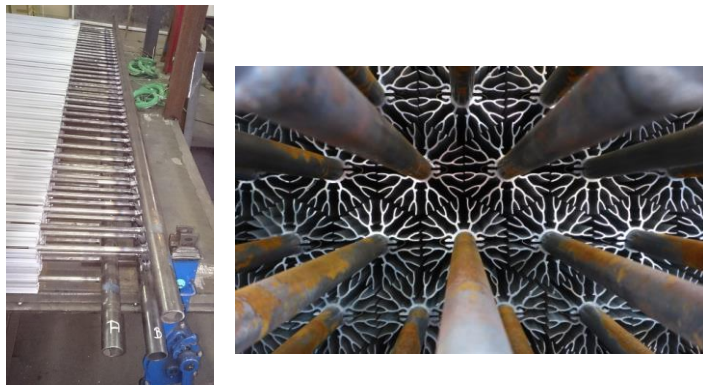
Storage unit build showing first rows welded into the tube plate assembly and lying on the side wall.
